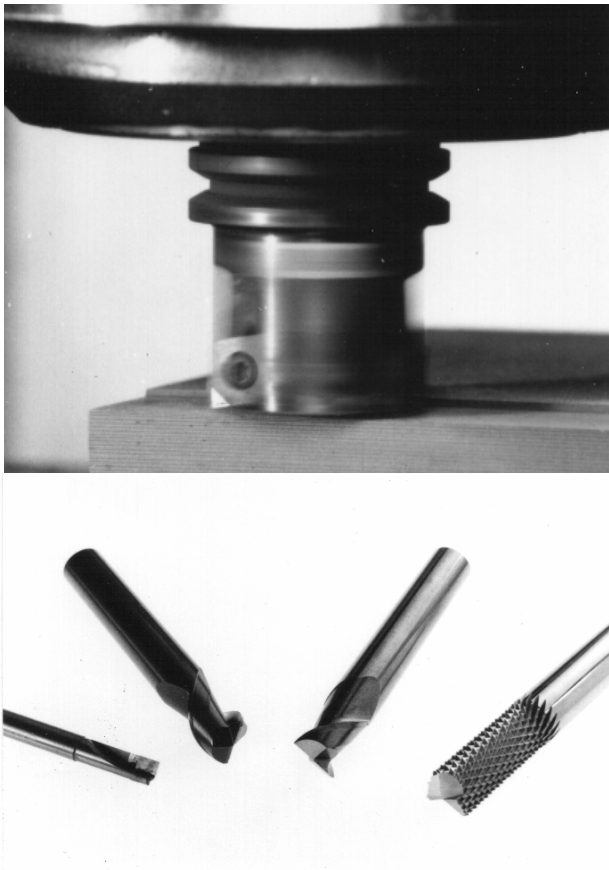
Tools applied in high-speed milling. Upper figure shows an ϕ 32 mm PCD face mill. Lower figure ϕ 6 mm PCD end mill, ϕ 12 mm aluminium oxide end mill, ϕ 12 mm cermet end mill and ϕ 12 mm glass-fibre router with special geometry.
